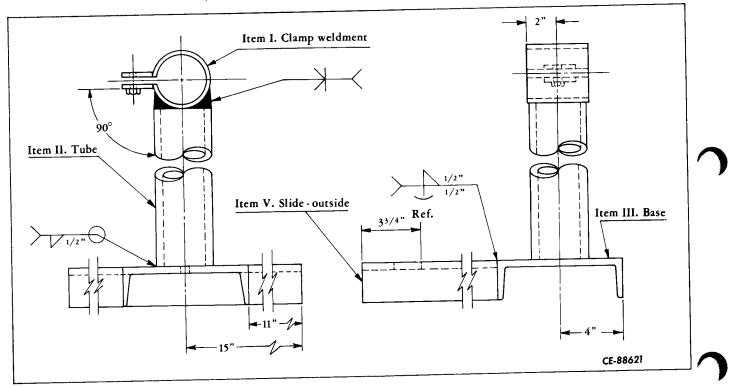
C. Stand Weldment Assembly - Right Hand (1 Required). (Details Shown in Figures 6-86, 6-87, 6-88 and 6-89.) PRINTED IN UNITED STATES OF AMERICA
